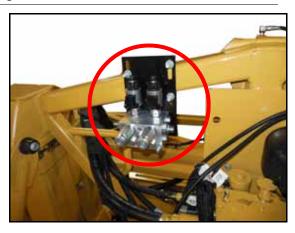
Fittings Installed in UltraGlide XT Valve
